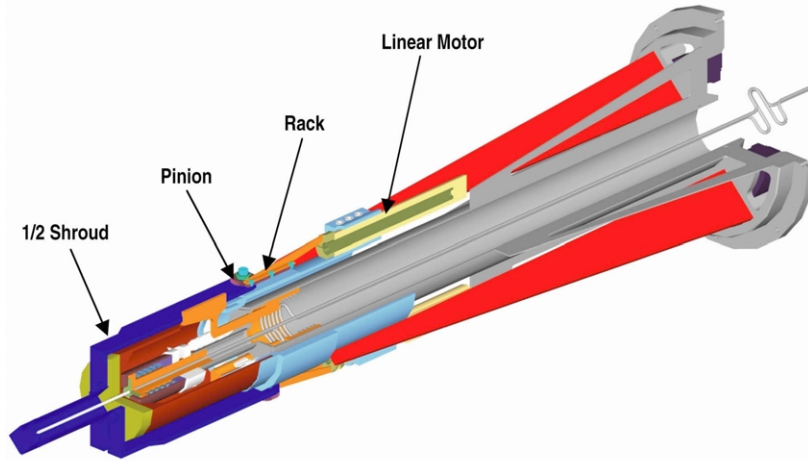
Mark-I front end including shroud actuator with electric linear motor and rack and pinion mechanism.
